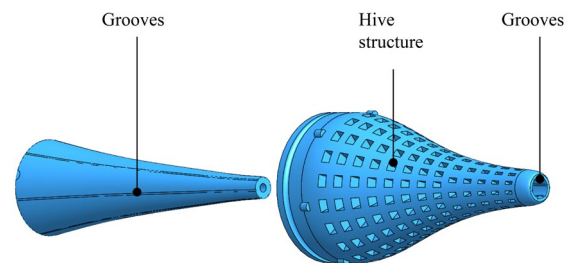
Exploded view of the double cone, showing the hive structure in the outer part of the double cone and grooves at the intersection of the inner and outer parts of the double cone to prevent clogging of the grooves during the 3D printing process.
